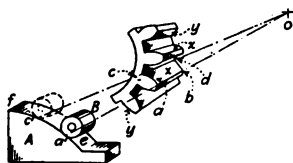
THE TEMPLATE PRINCIPLE OF FORMING GEAR TEETH
